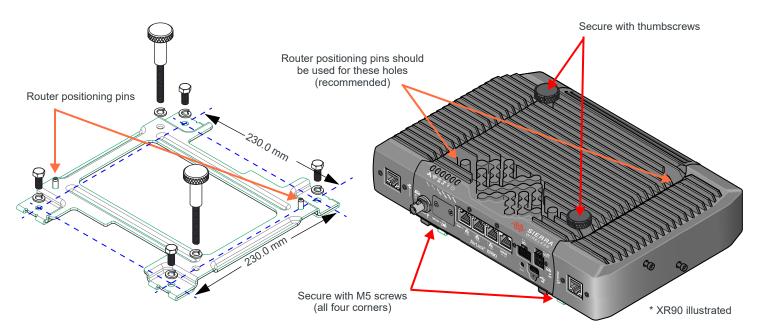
XR80/XR90 Bracket Mounting Installation Example
